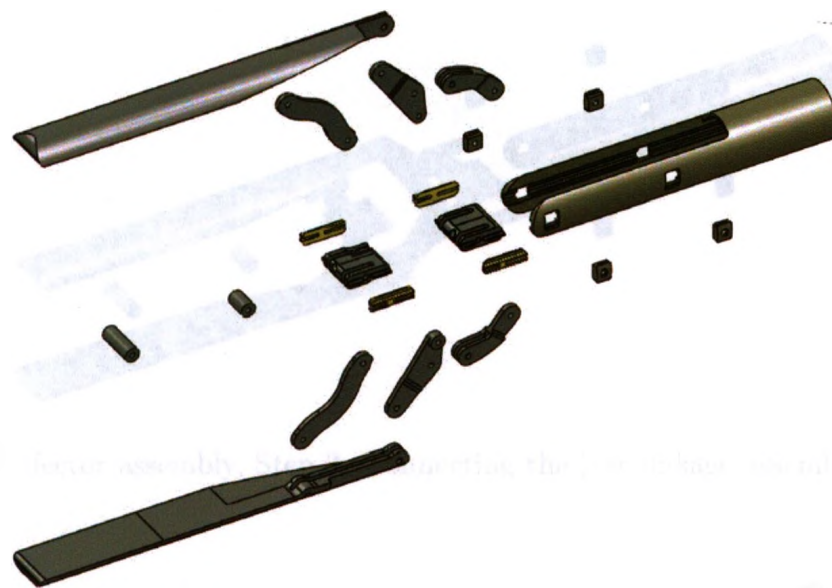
End effector assembly, Step 1: Exploded view of all components.
